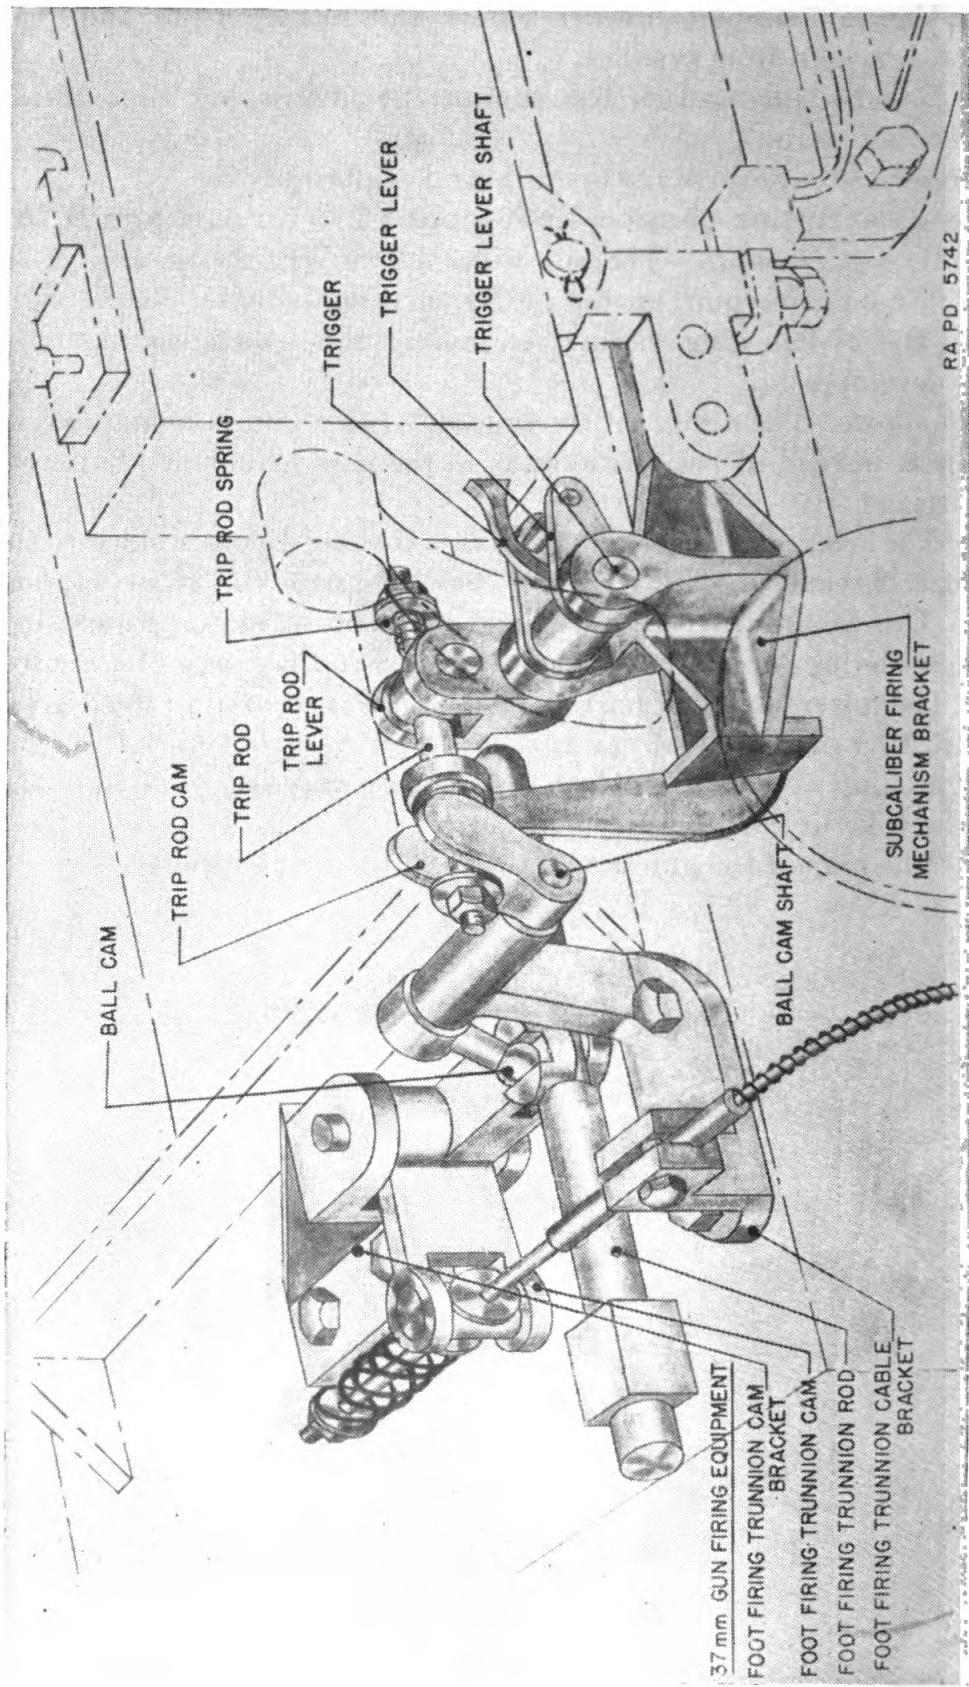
Subcaliber firing mechanism, mount T10, carriage M3A1.
